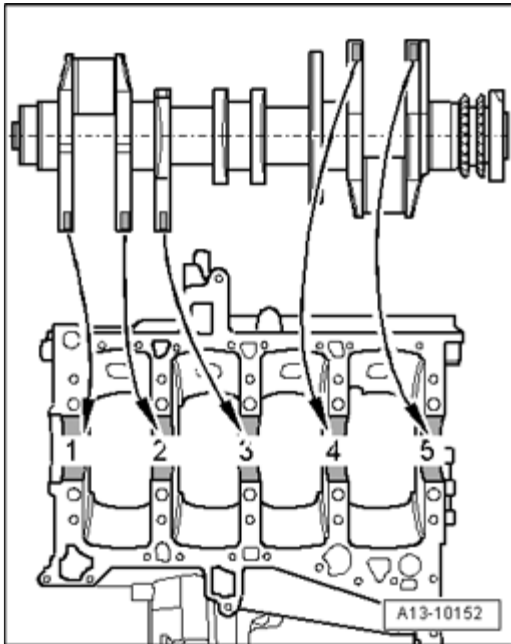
Allocation Of Crankshaft Bearing Shells For Guide Frame - Version I
